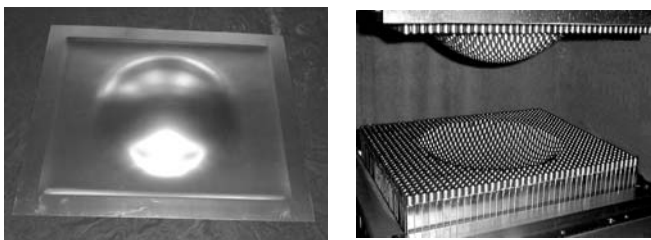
Sheet metal part formed by digitized-die ( $40 \times 32 \times 2$  punches) with blankholder
